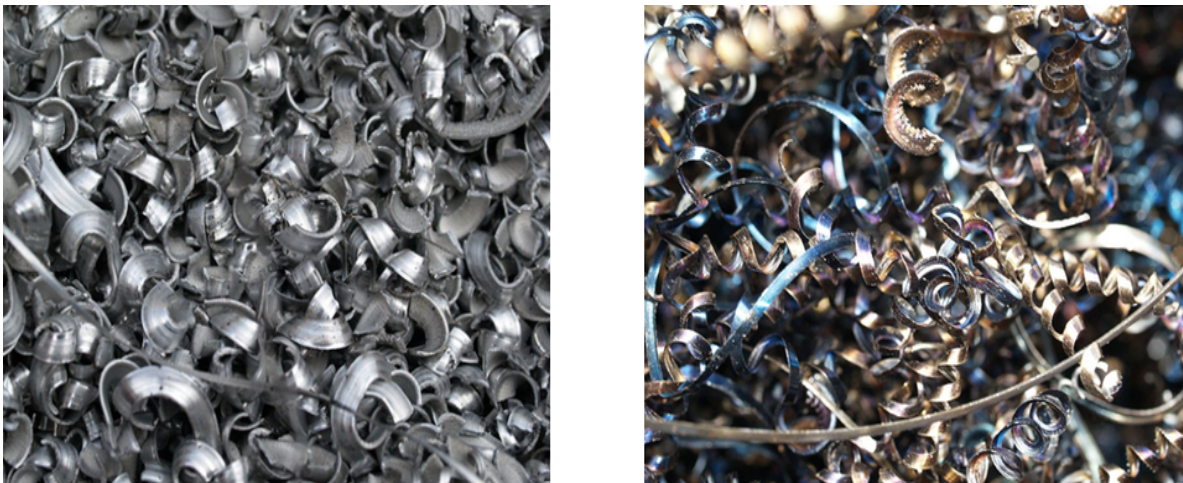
Examples of Broken (Left) and Bushy (Right) metal shavings.
